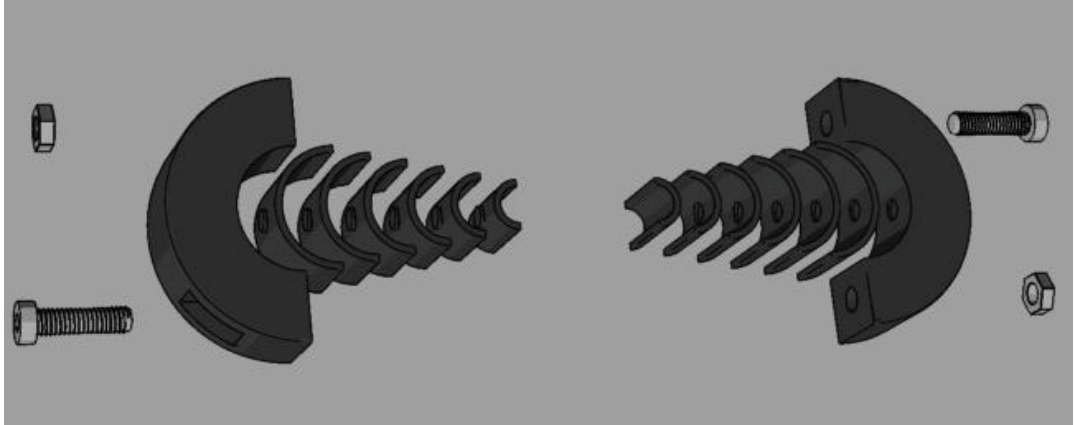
Exploded view of the layered plain bearing connector showing the stud connections between the pieces (Heikkilä, 2013)
